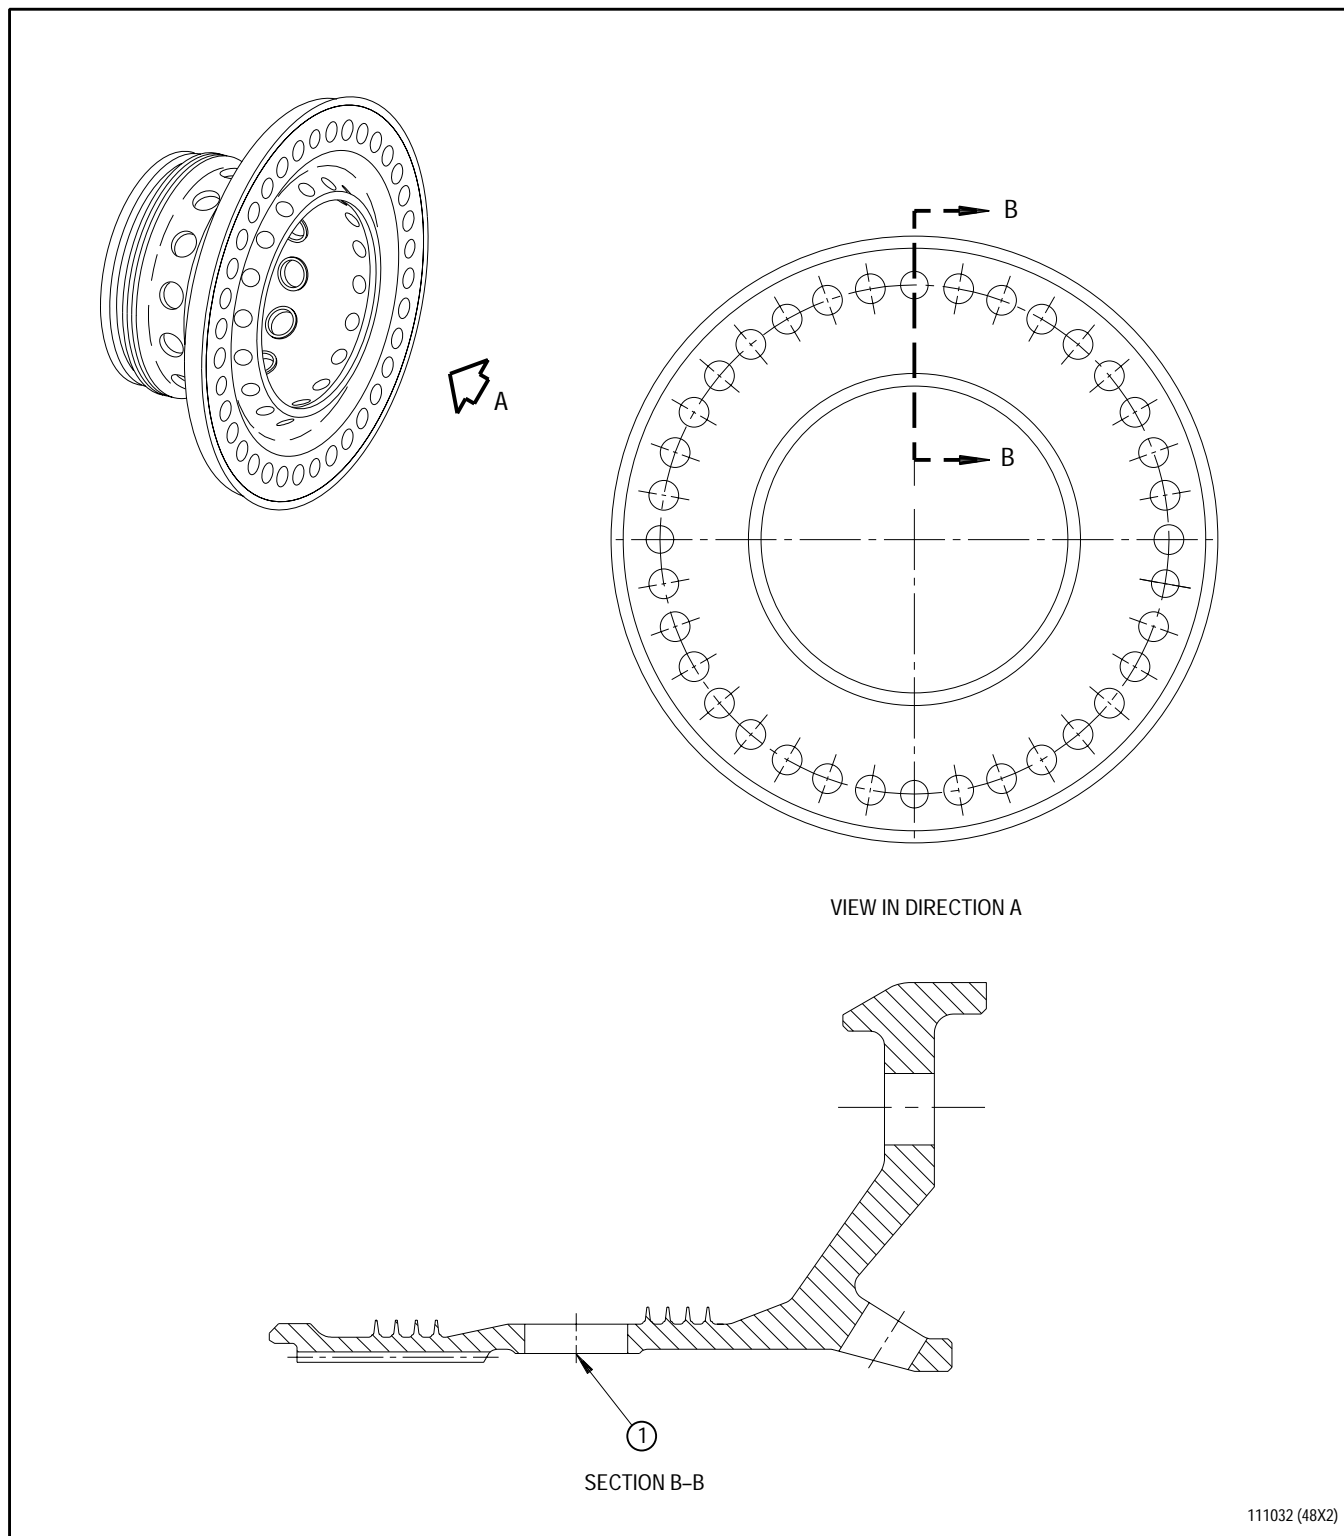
Front Turbine Hub Assembly - Blend Cooling Hole Radius
